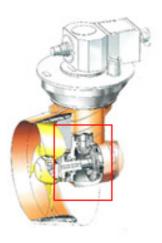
; Identified damage is shown in the red squared part in the bevel gear (gear used when it turn right angle).
